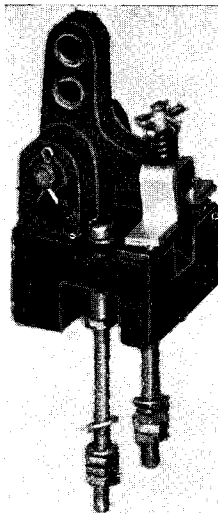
TYPE L-39 ELECTRICAL INTERLOCK MAKE OR BREAK
